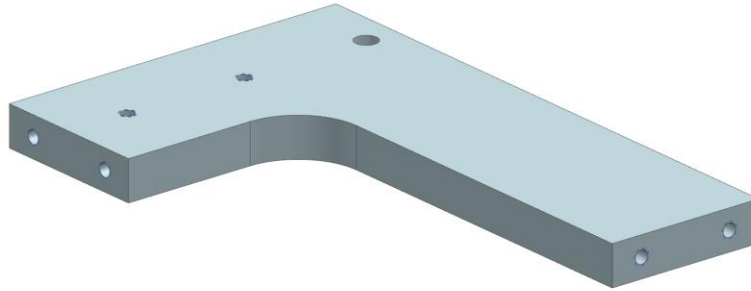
Isometric view of Base Frame Connecting Plate #1.
